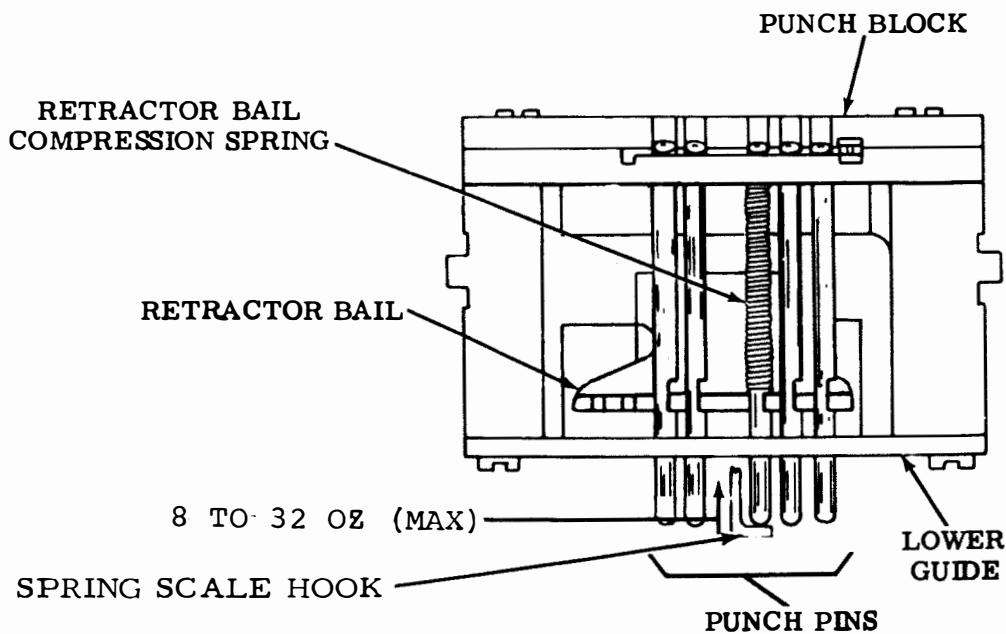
Retractor Bail Compression Springs (For Chadless Tape), Left Side View
